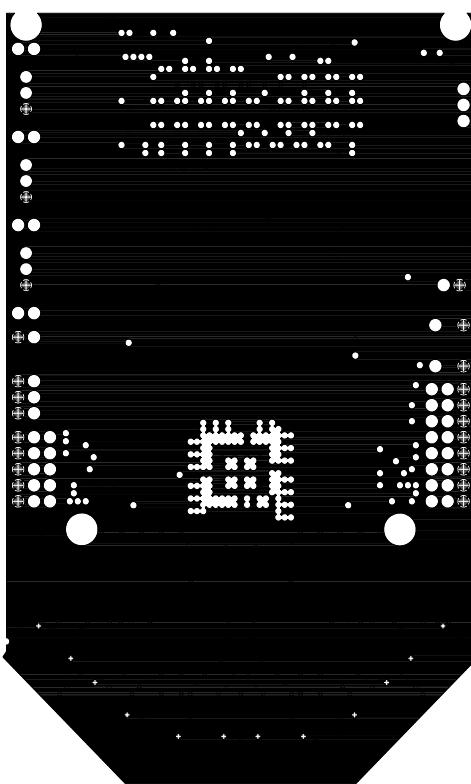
Si5100-EVB Layer 4—GND2 Plane (Daughter Card)
